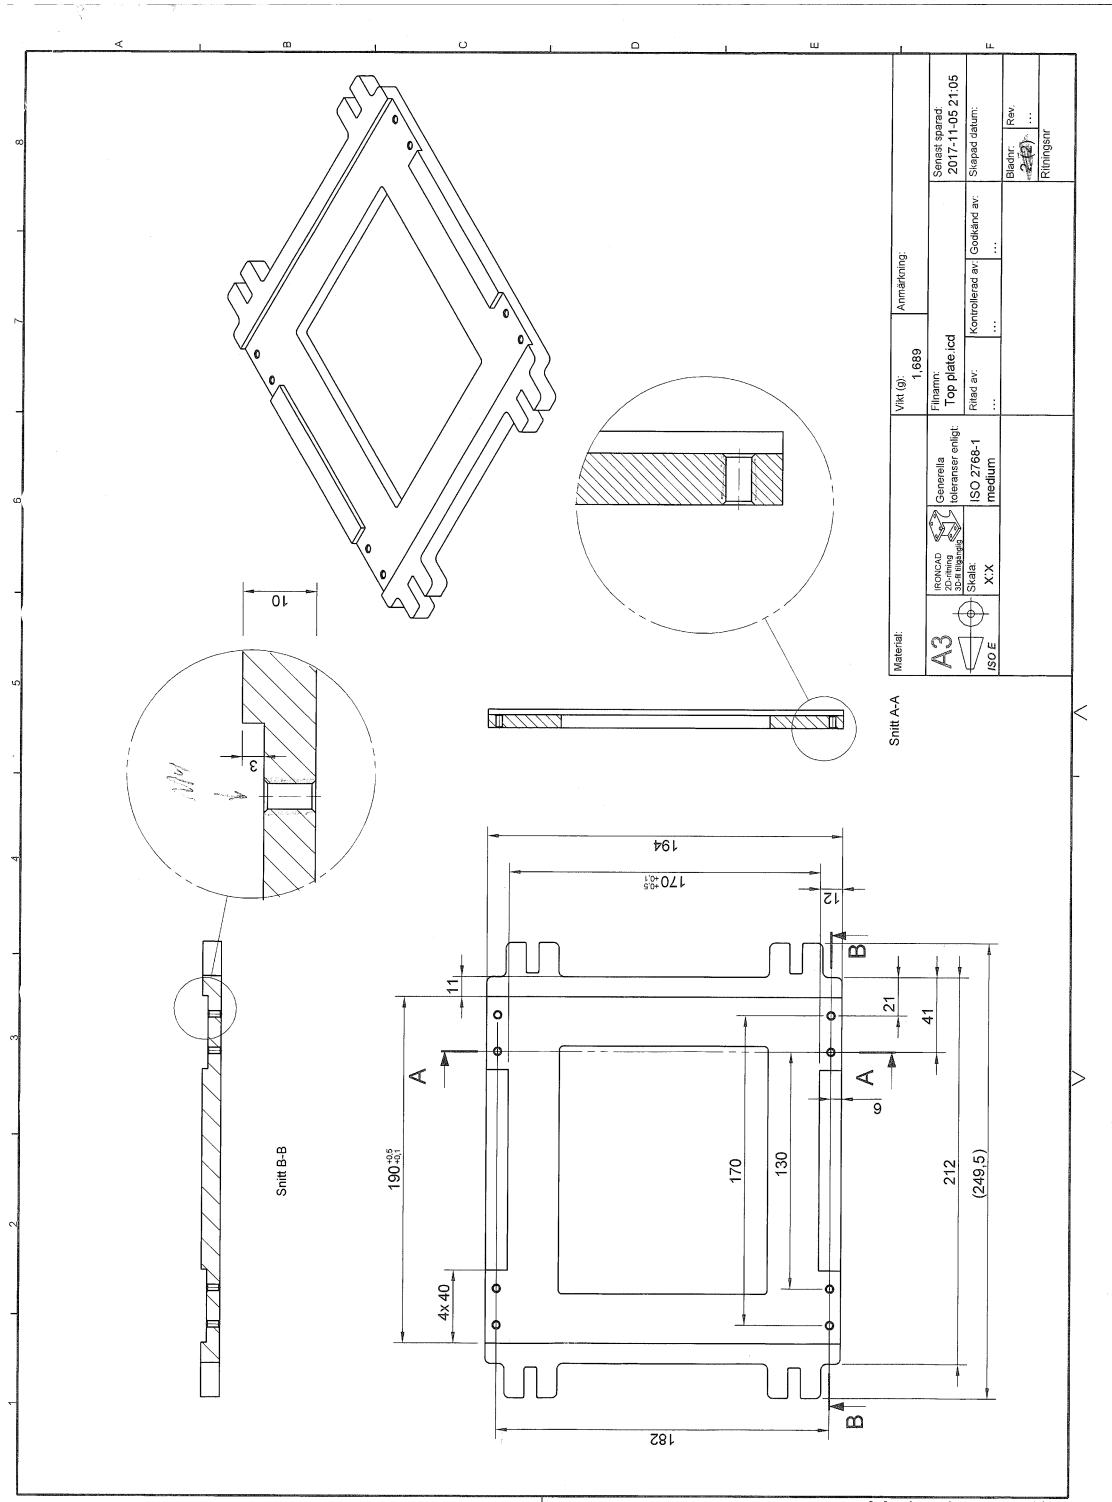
Technical drawing of the lid frame. Distances are given in mm.
